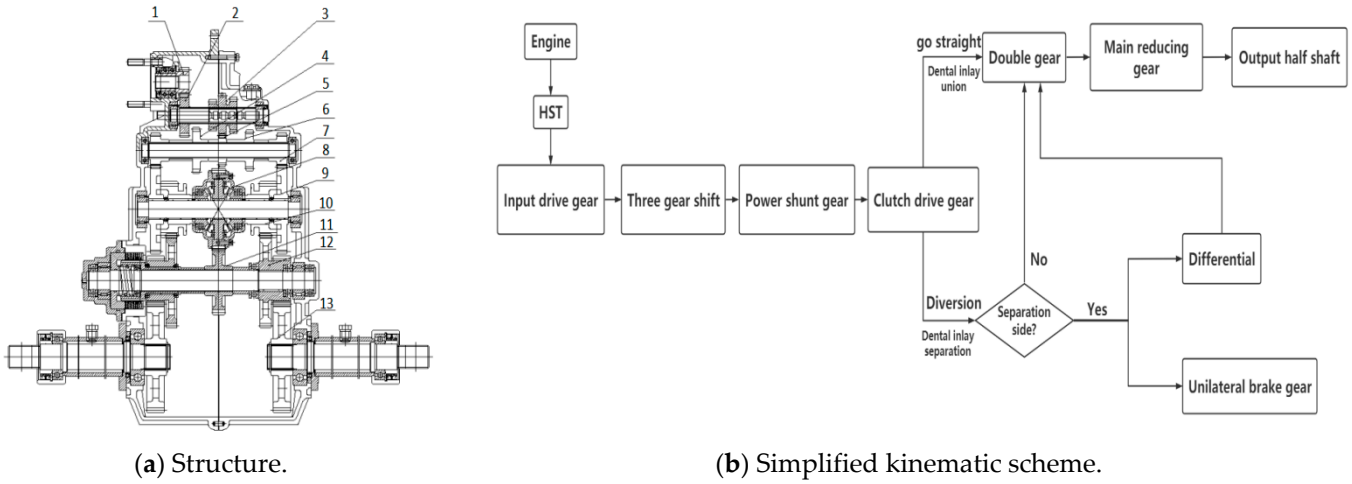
Diagram of differential inverse gearbox: 1—Input driving gear; 2—Input driven gear; 3—Shift transmission gear (first gear, third gear, second gear from left to right); 4—First driven gear; 5—Third driven gear; 6—Second driven gear; 7—Power shunt gear; 8—Clutch driving gear; 9—Clutch driven gear; 10—Clutch driven gear; 11—Differential steering brake gear; 12—Double gear; 13—Main reducing gear.
